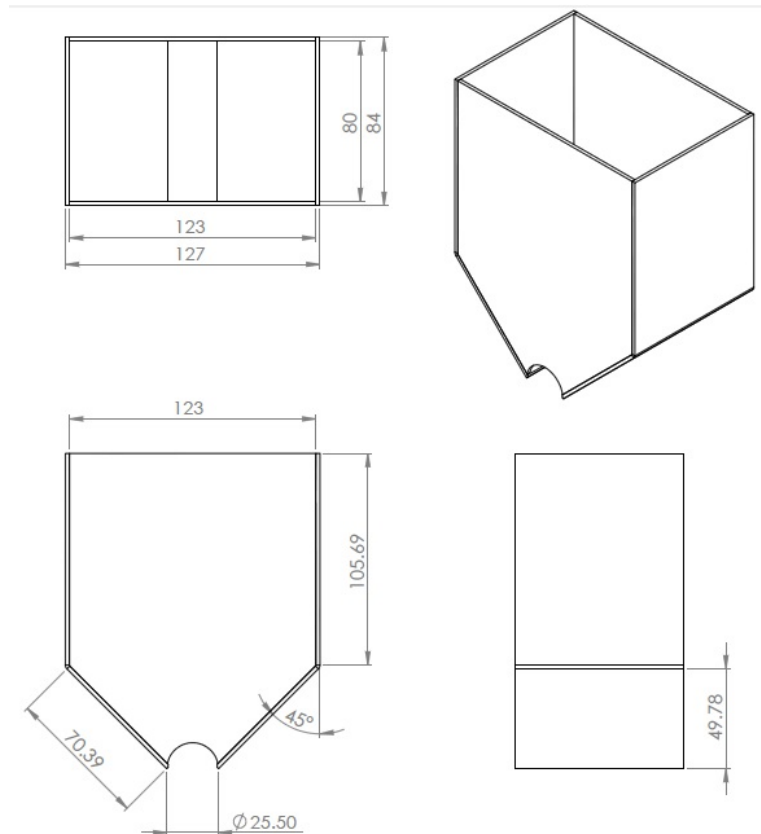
Initial hopper design dimensions. All dimensions are in millimetres.
